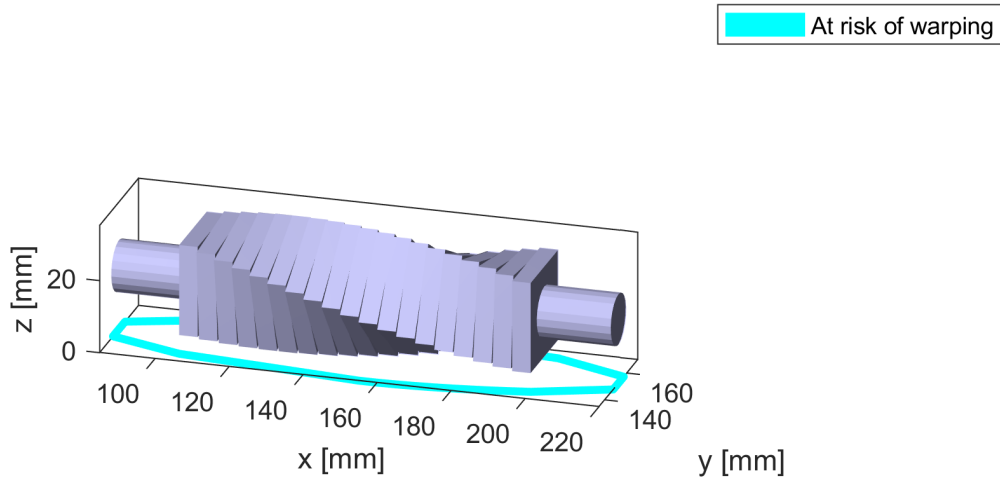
Will It Print highlights the base area of the part, indicating that the part is expected to warp.
